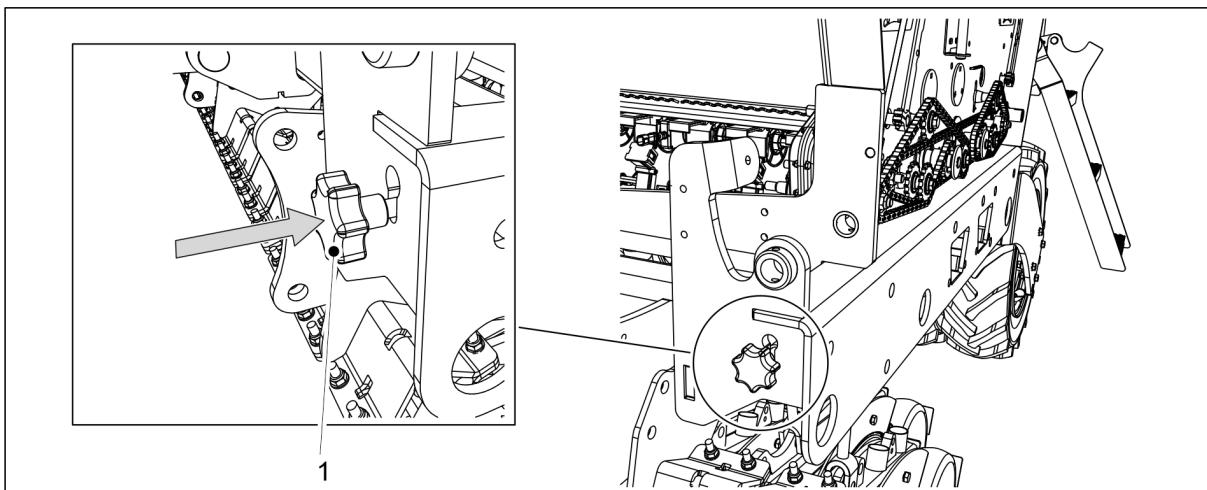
184. Inserting the calibration test adjuster rod
